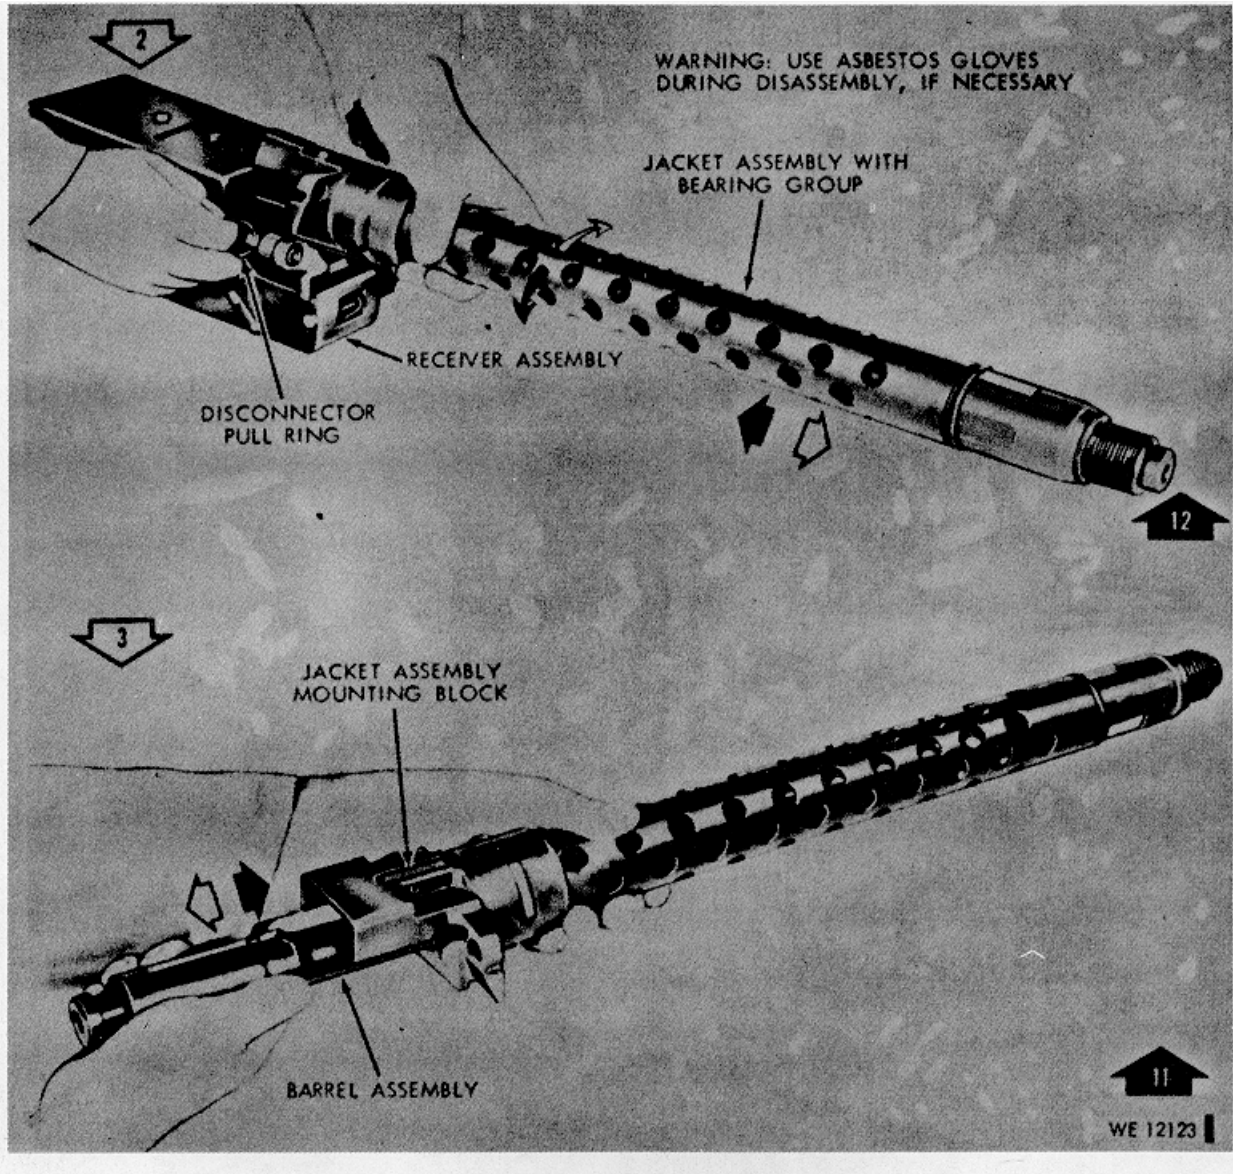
Disassembly/assembly - 7.62mm machine gun (2 of 4).
